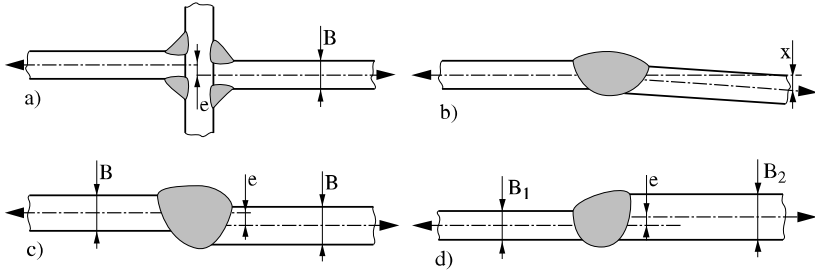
Misalignments: a) axial, in a cruciform assembly; b) angular or c) in a butt welded joint; d) axial, due to a change of thickness in a butt welded joint; from [MAD 80]
